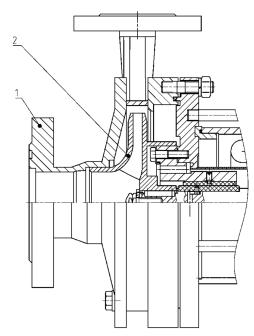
CH 12.5/50-4-2 pump drawing (pumping part).
